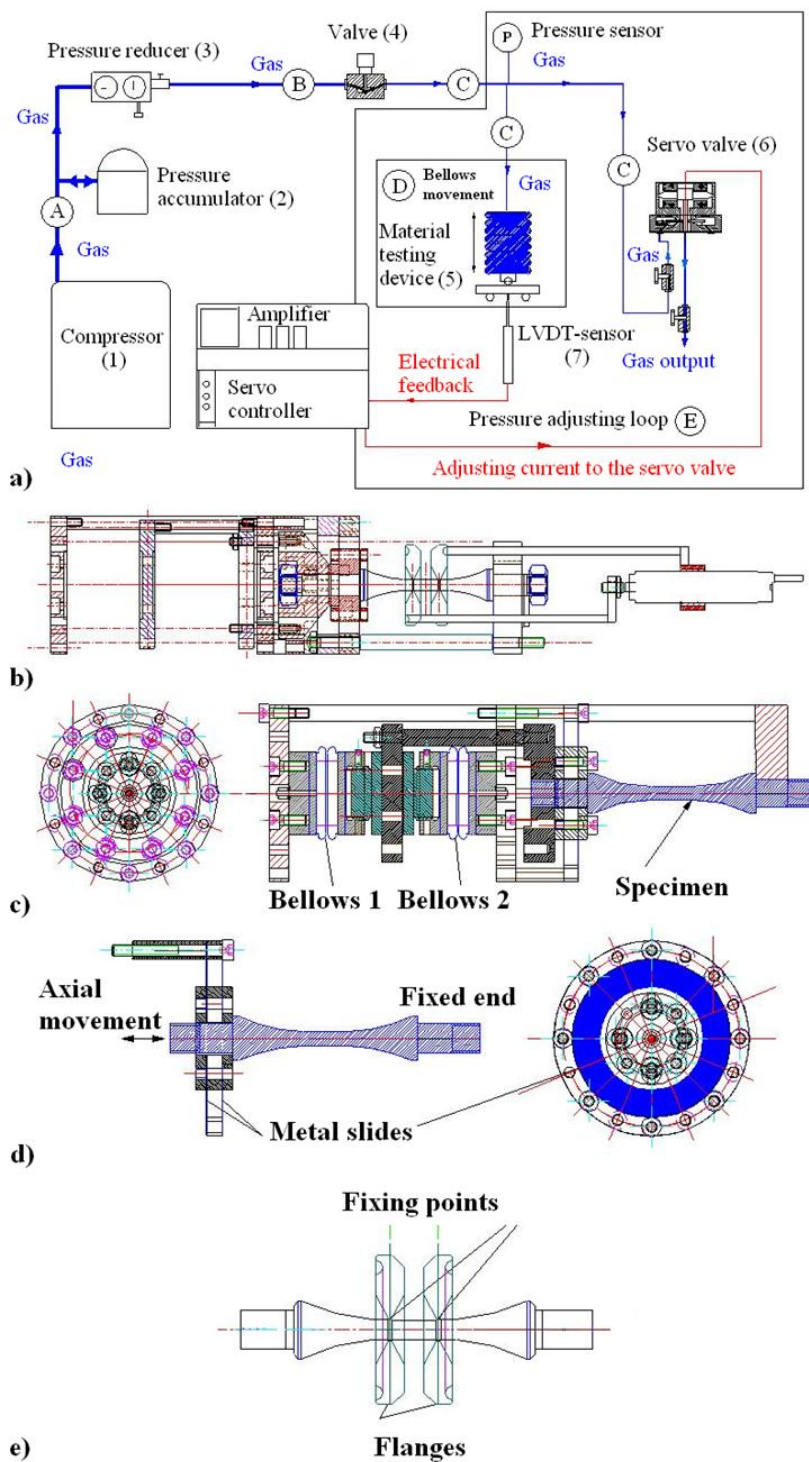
a) The main components of the HIPS system, b) the main parts of the displacement measurement system, c) the loading frame, d) the specimen fixing parts and e) the LVDT fixing flanges.
